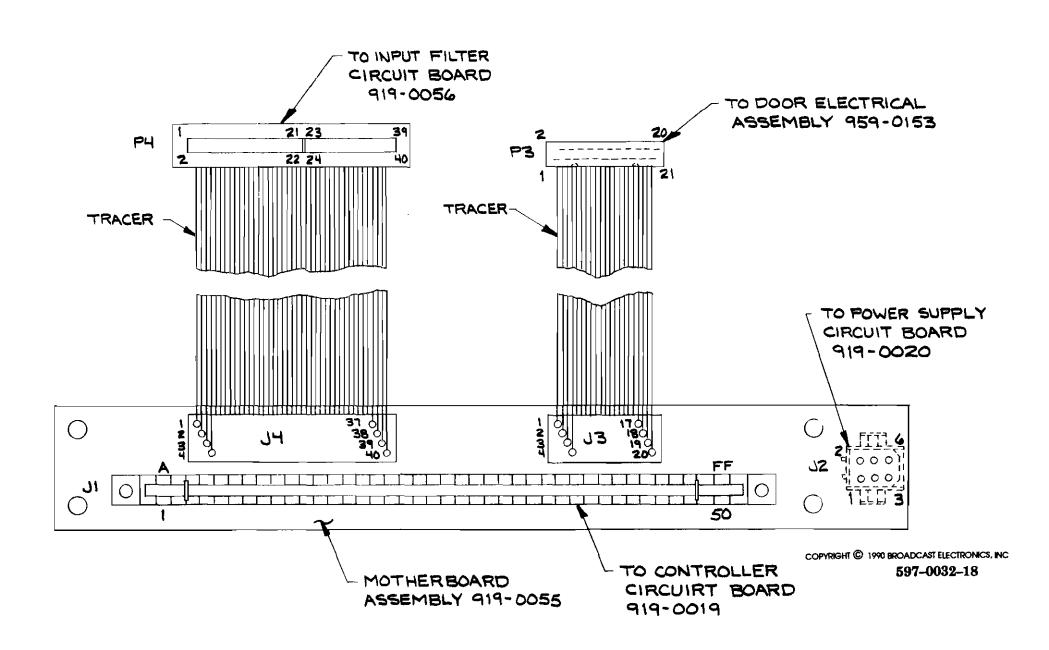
MOTHERBOARD ASSEMBLY
